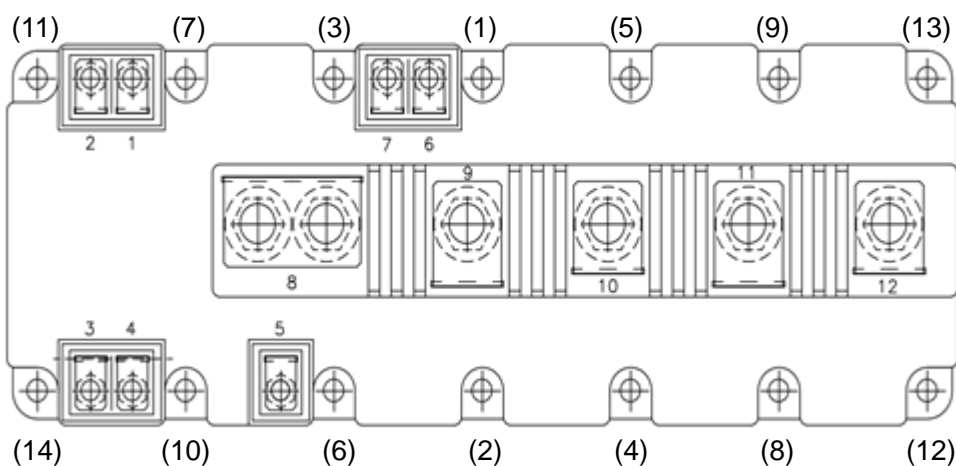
Mounting holes connecting sequence (1) – (14) (M272 package)
